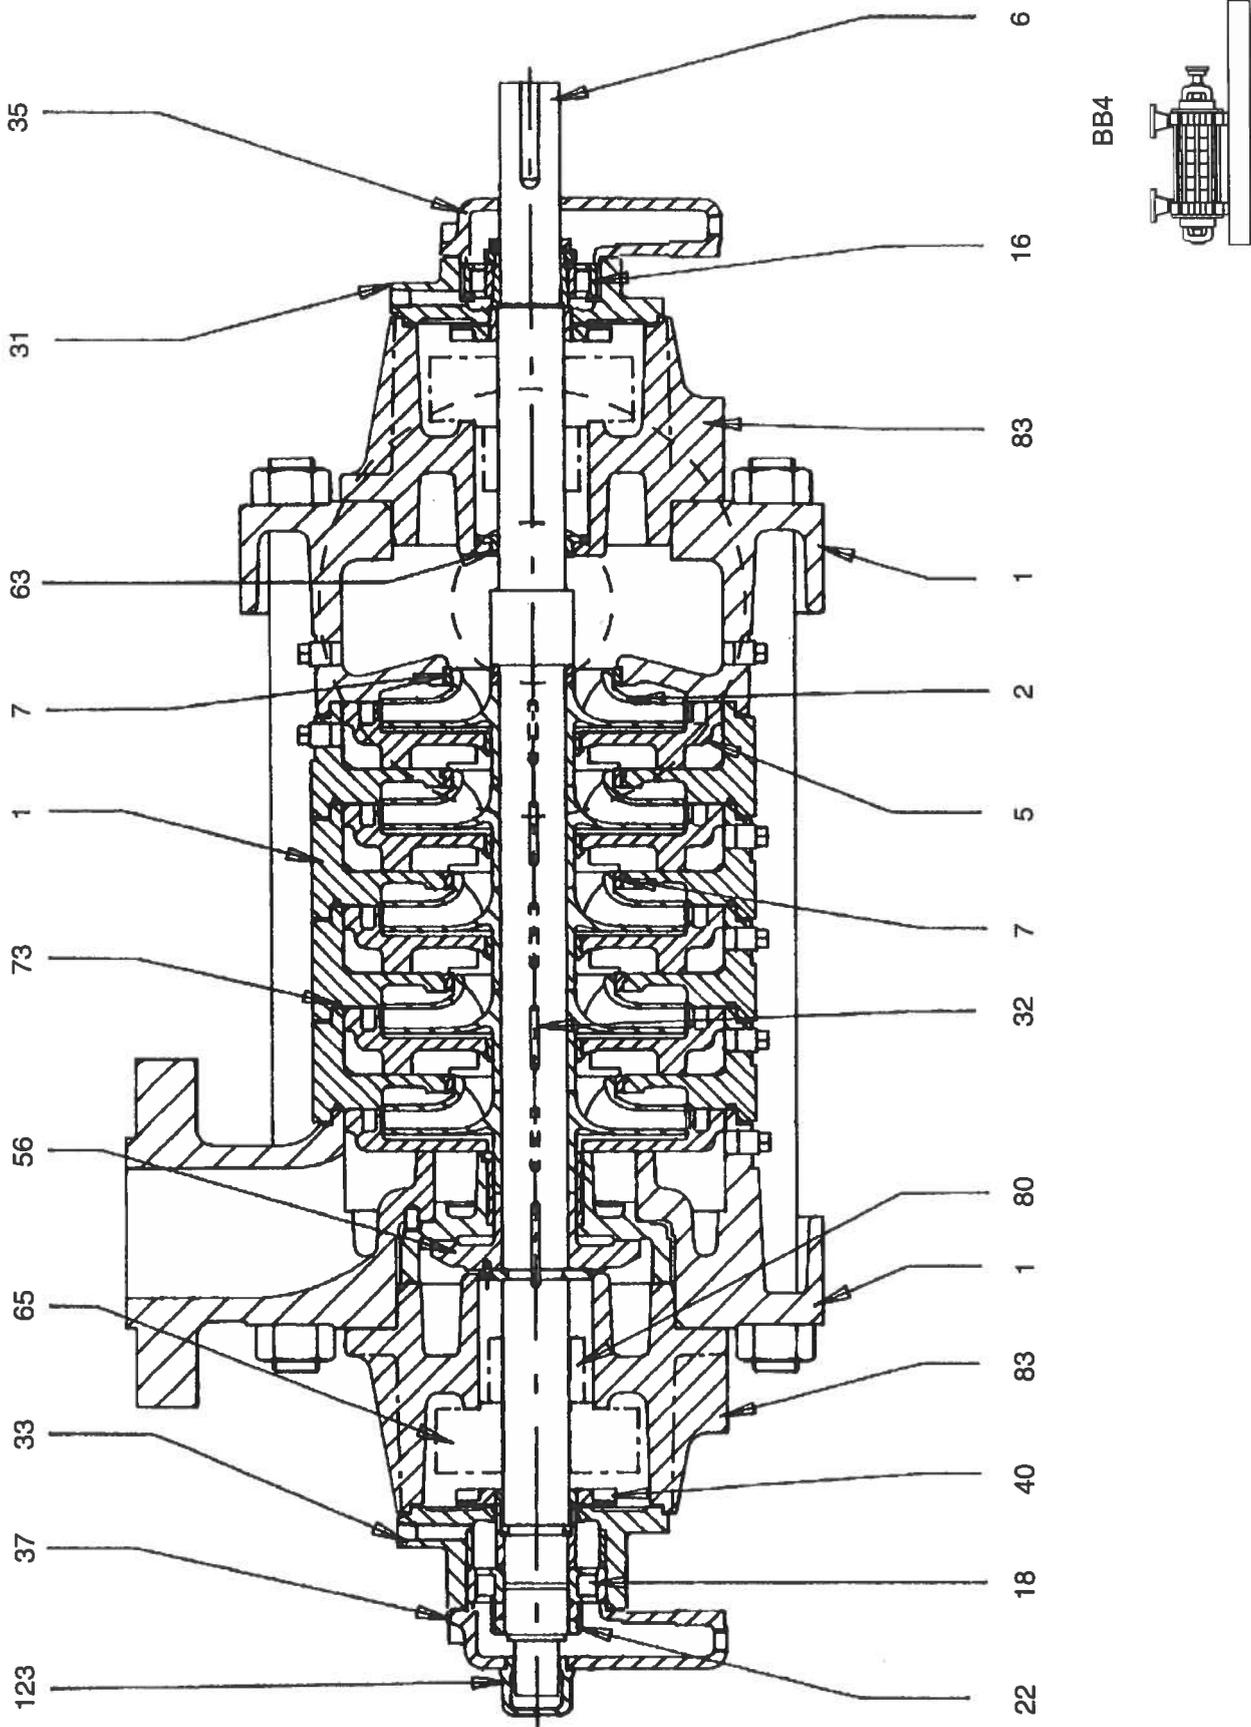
Impeller between bearings – flexibly coupled – multistage – radial split case
